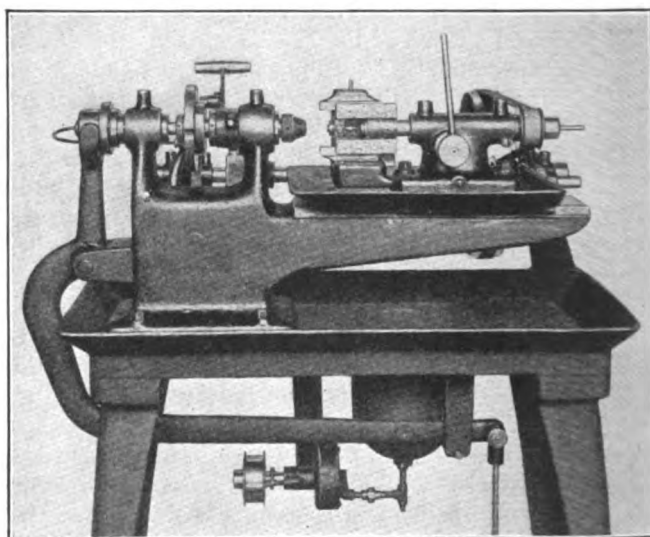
MACHINE FOR DRILLING PERCUSSION NEEDLE PLUG
